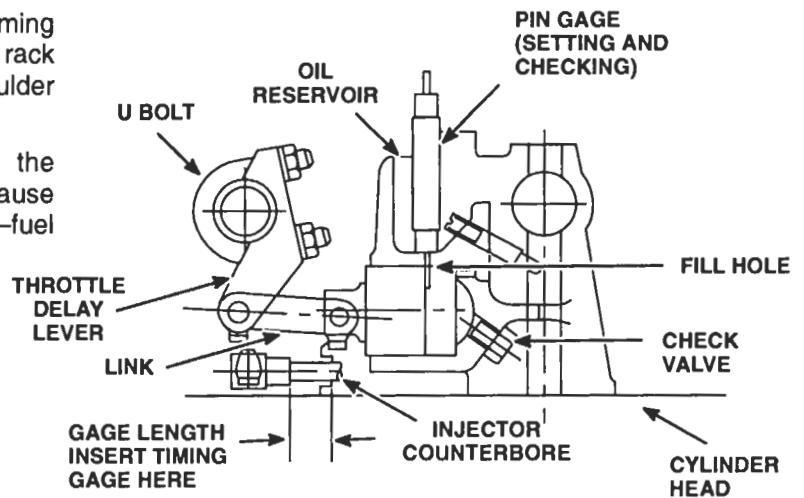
Adjusting Throttle Delay Cylinder (Current)
